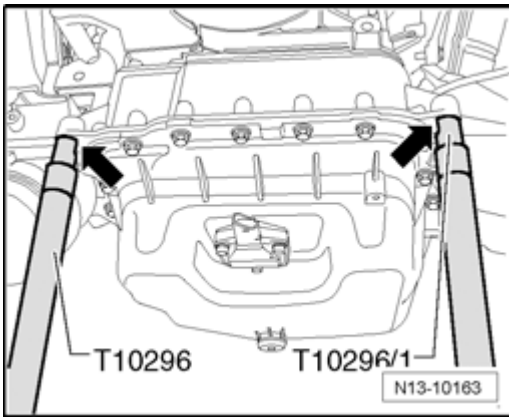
Assembly Supports T10296 With Adapters T10296/1 Placed At Lifting Points
